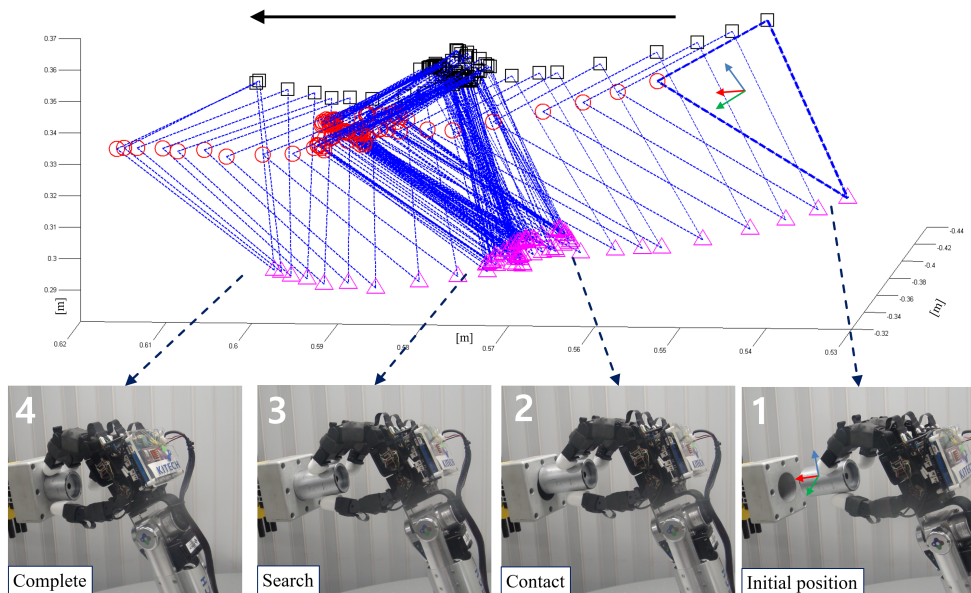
Peg-in-hole assembly with hand-arm coordinate.
